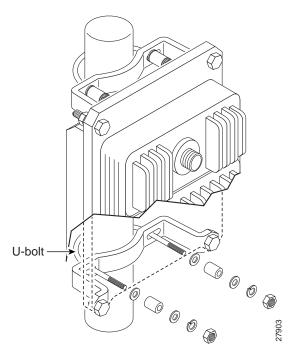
Attaching the Transverter to the Top Mounting Bracket
